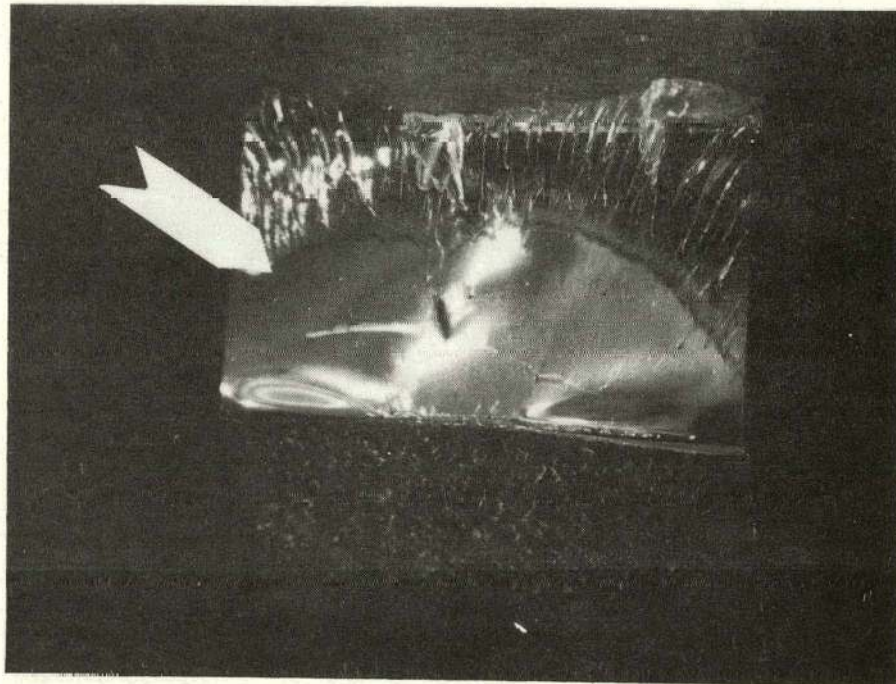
Brittle Fracture Surface of Fracture Toughness Tensile Specimen A-3: Arrow Shows Location of Area Photographed in Figure 17 (4X)
